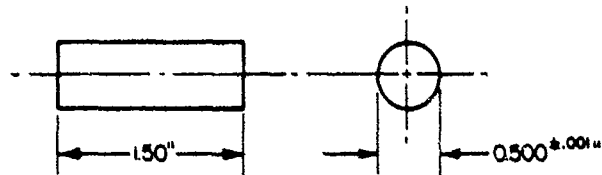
Compression specimen for 15-5PH (H935) casting.
